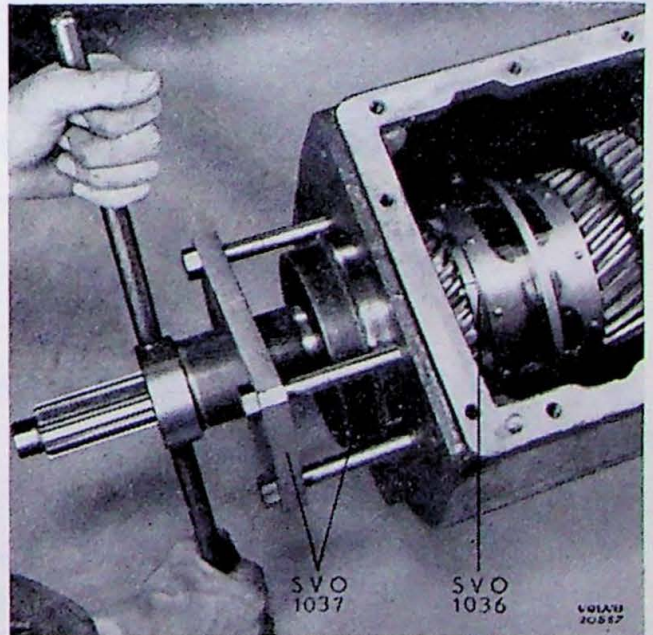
35. Fitting the bearing on the main drive pinion, K 12.
